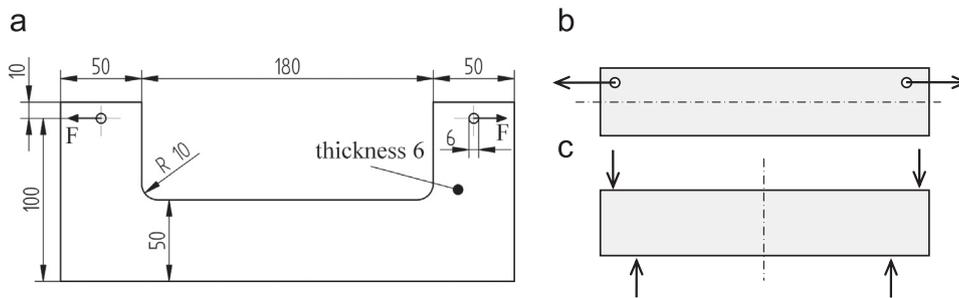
Calibration specimens: a) the one proposed in the first paper on RGB photoelasticity (dimensions in mm); b) eccentrically loaded tensile specimen, c) four points bending specimen.
